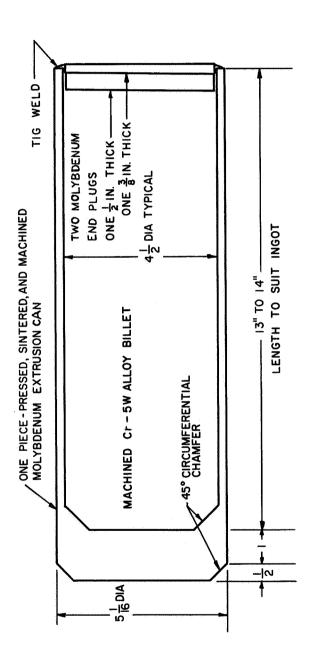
SCHEMATIC DIAGRAM OF TYPICAL EXTRUSION CAN AND BILLET ASSEMBLY
